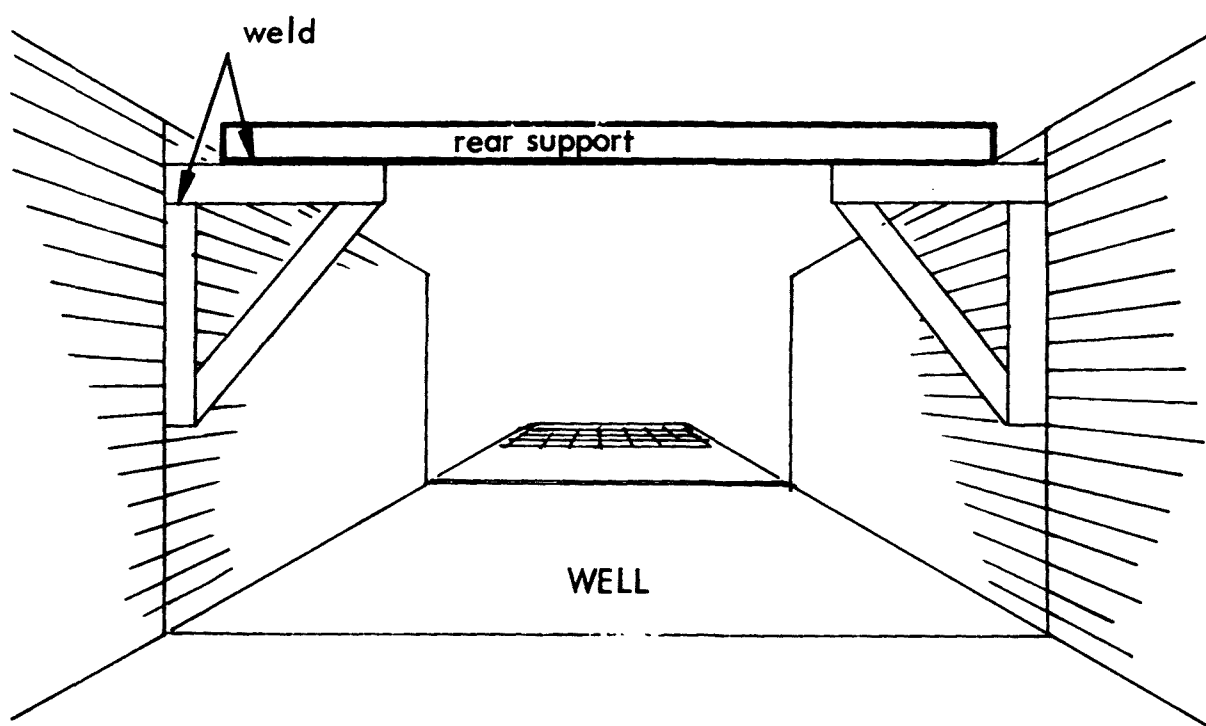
Bracket Attachment of Rear Conveyor Mount
